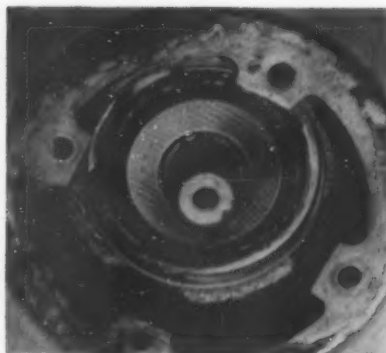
A—Outer Bearing of Heavy Duty Truck Front Wheel After 40,000 Miles Using Grease A, B, or C.
